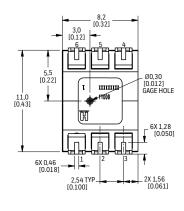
SMT Package Dimensional Drawings (For reference only: mm [in].)
